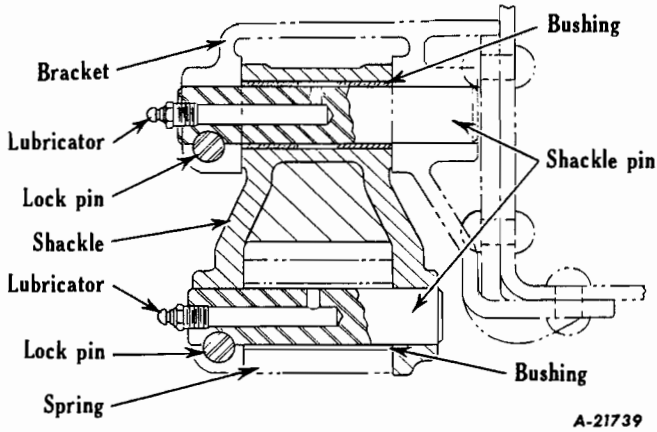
Rear Spring Rear Shackle For Models L-160, L-163, L-164, L-165, LC-160, L-170, L-173, L-174, L-175.
